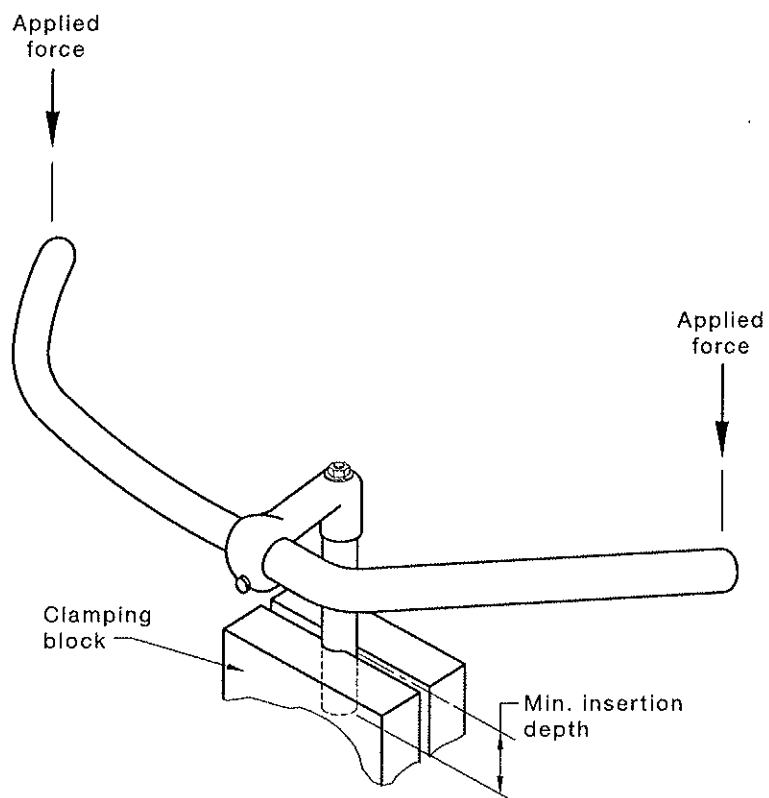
TORQUE TEST ON HANDLEBAR/STEM ASSEMBLY
